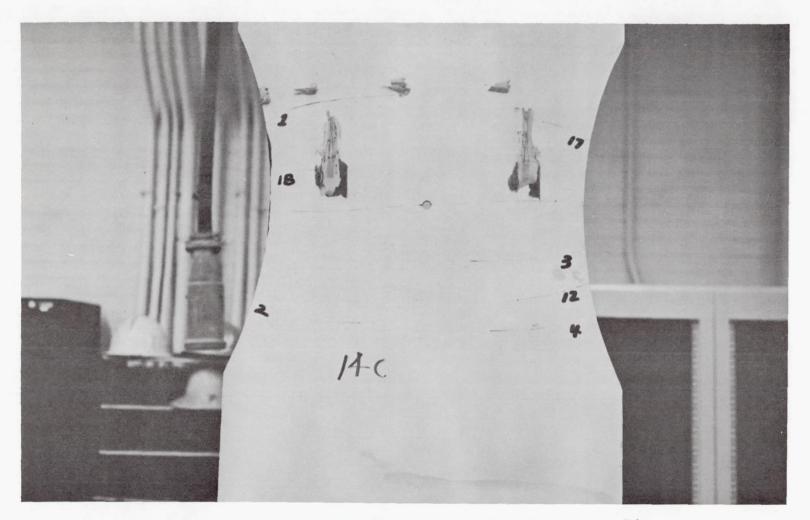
OUTSIDE FACE SHEET AFTER CRACK GROWTH TEST - PANEL #14C
